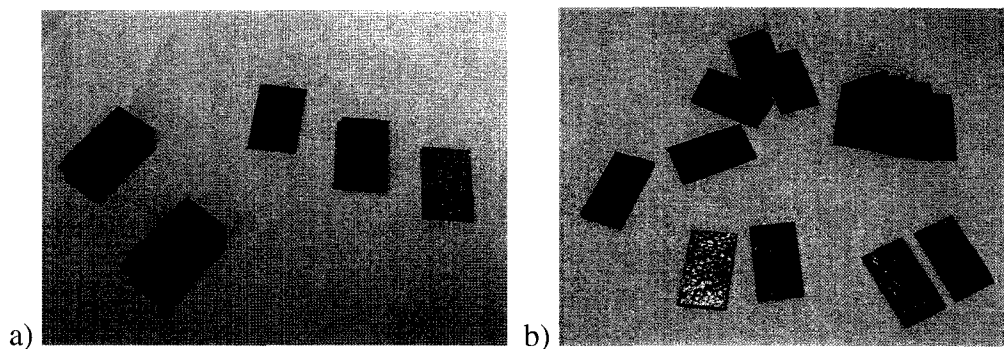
Test samples, showing de-lamination: a) 0.120" section; b) 0.063" section
